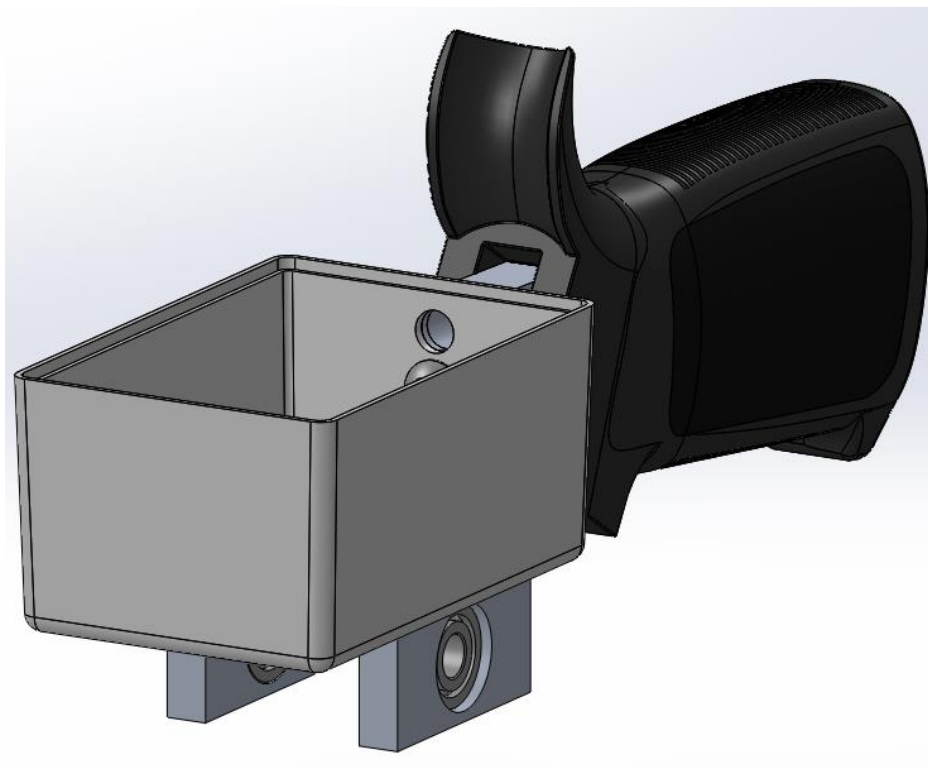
SolidWorks Subassembly of Arm and Bearing
